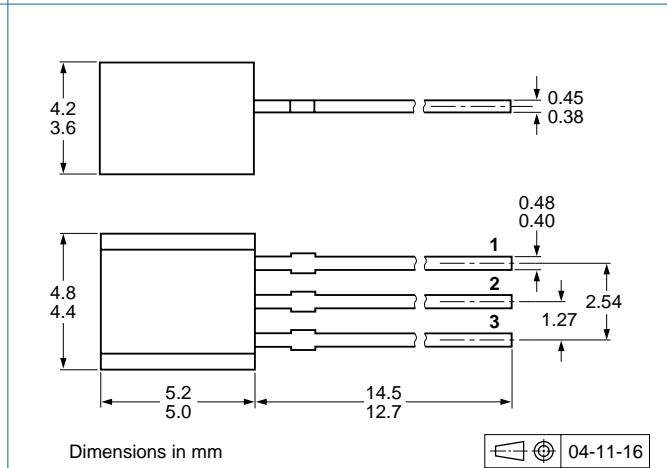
Package outline SOT54 (SC-43A/TO-92)
